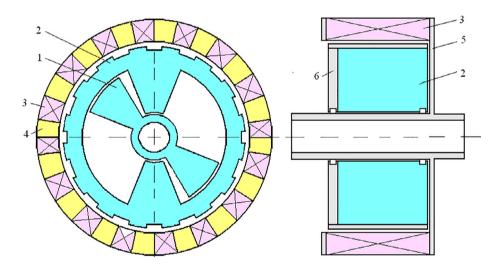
Cross-sectional view of rotor ICA with both free rotor and body: 1 – free rotor, 2 – free body with the magnetic conductor, 3 – electro winding, 4 – magnets, 5 – connection of the rotor with electromagnets, 6 – cover.
